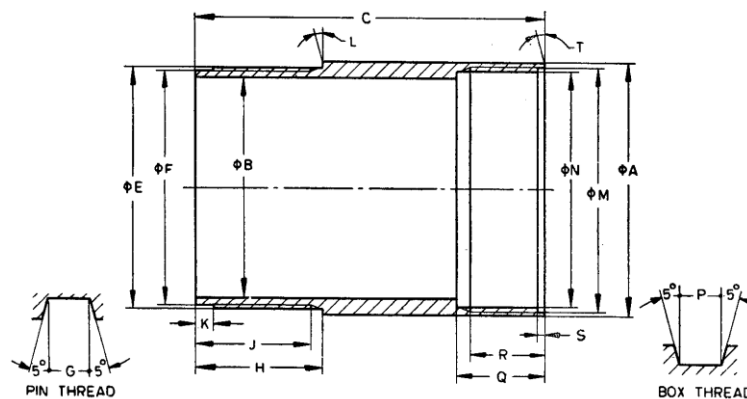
'WF' DESIGN DOUBLE TUBE CORE BARREL — INNER TUBE EXTENSION
